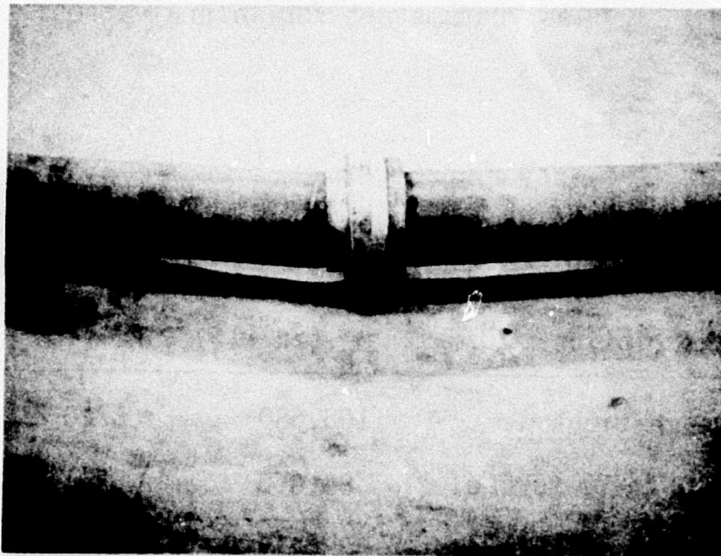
Bottom view of UNF union wrench-tight sample after lateral-stress test.
